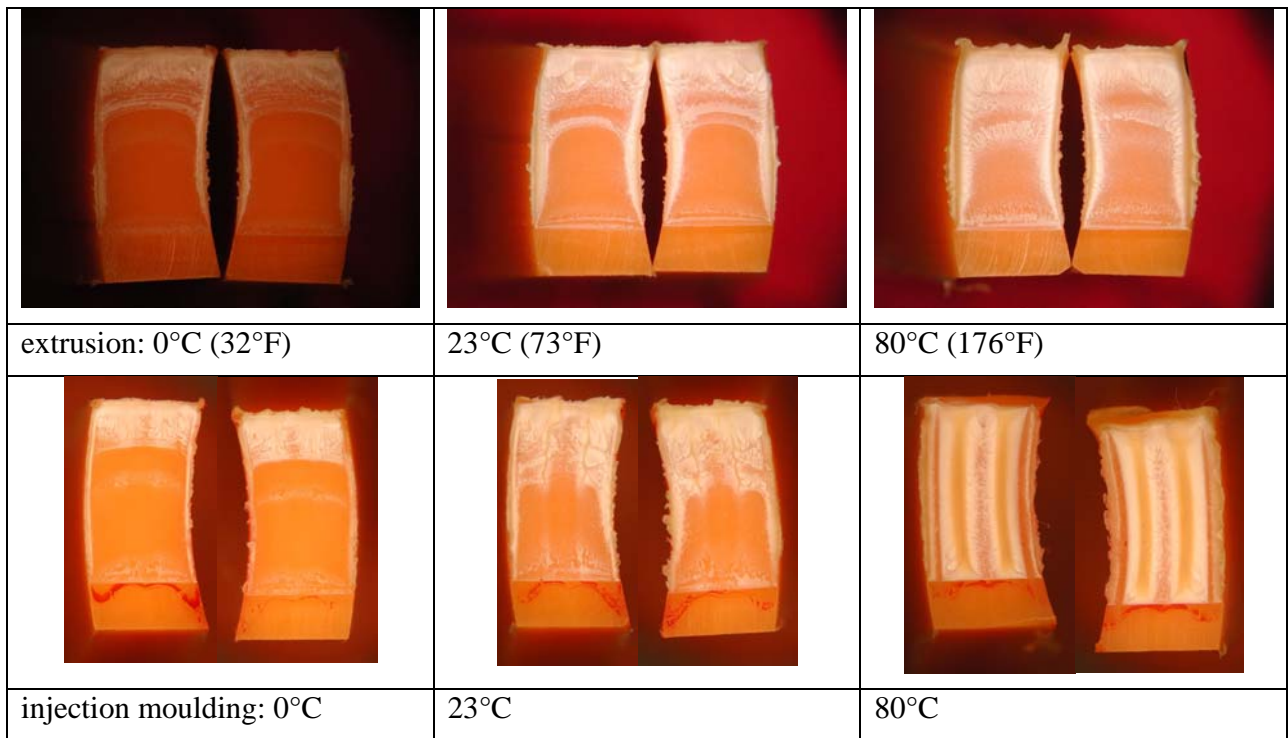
3PB fracture surface of PE2, extruded and injection moulded pipe samples at 0°C, 23°C and 80°C
